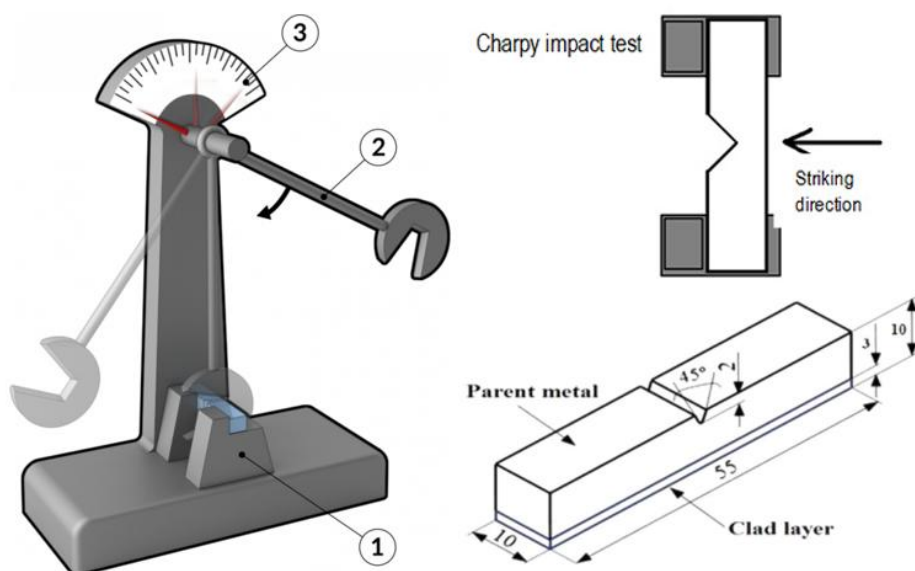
Charpy Impact Test Equipment and Specimen Measurements
